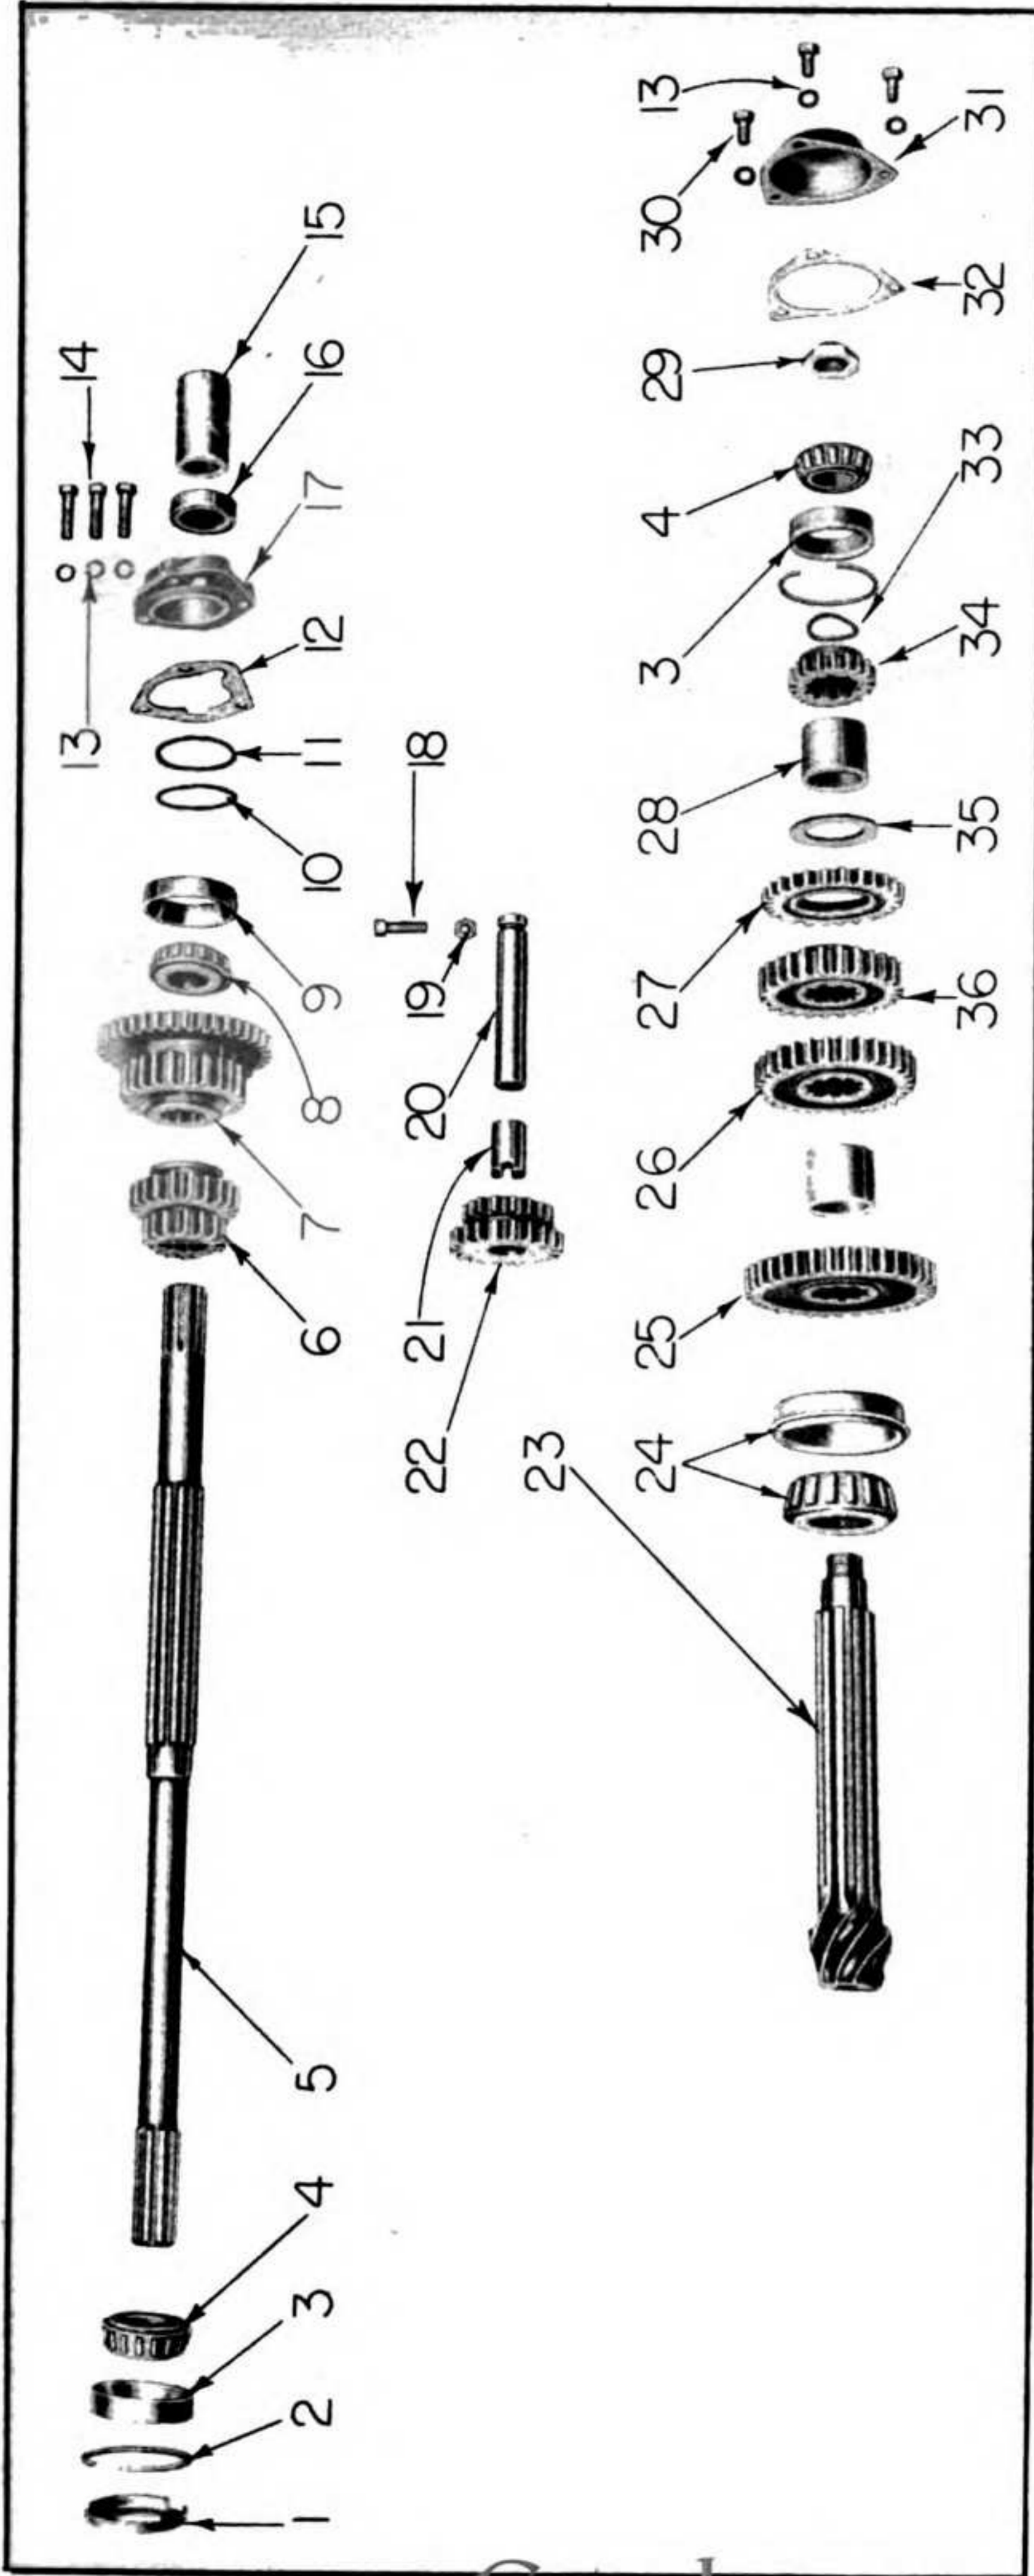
0702 TRANSMISSION SHAFT AND GEARS
